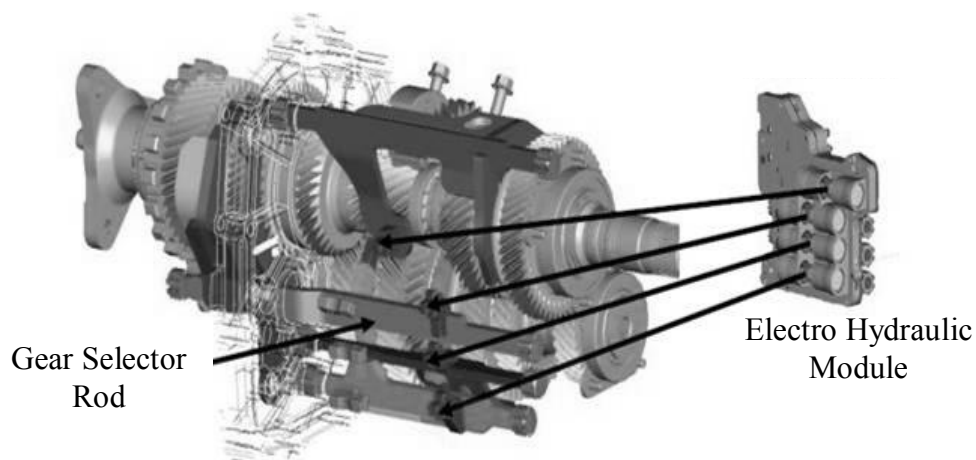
Hydraulic system to actuate the fork gear selector [118].
